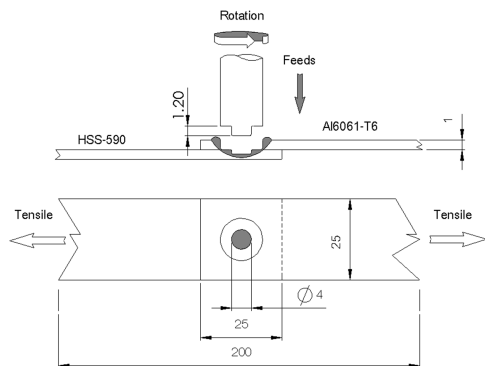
Friction stir spot welding process and tensile test of specimen in the experiment.
